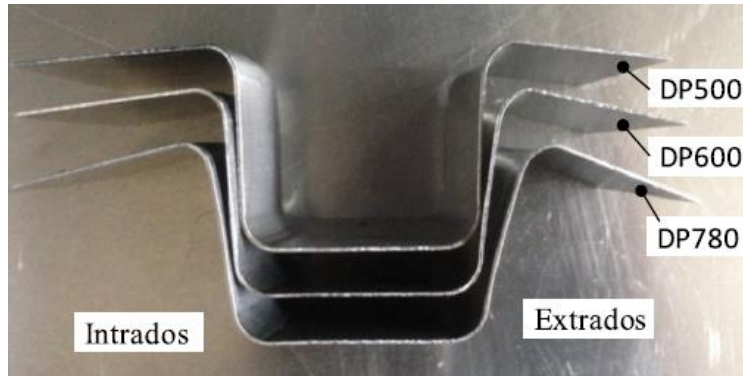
Springback after U-Shaped Bend Test for DP500, DP600 and DP780 [12]
